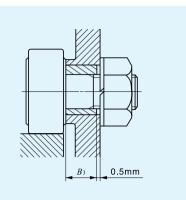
Length of the mounting hole of Eccentric Type Cam Follower
